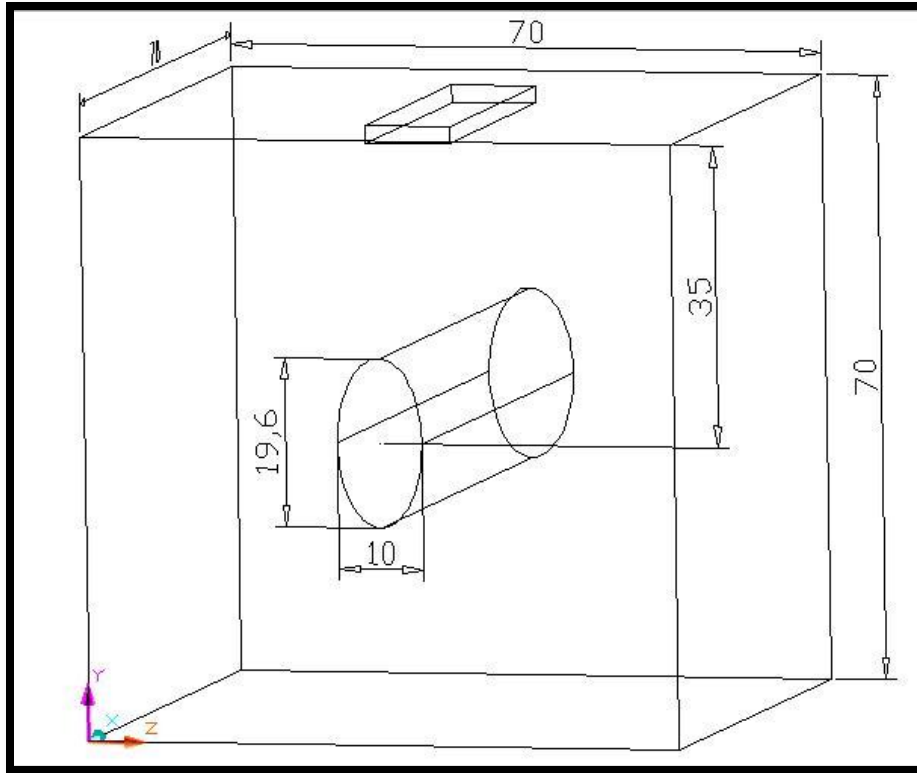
3D view for Dimension of Ellipse Vertical shape cross-sectional cooling channels
